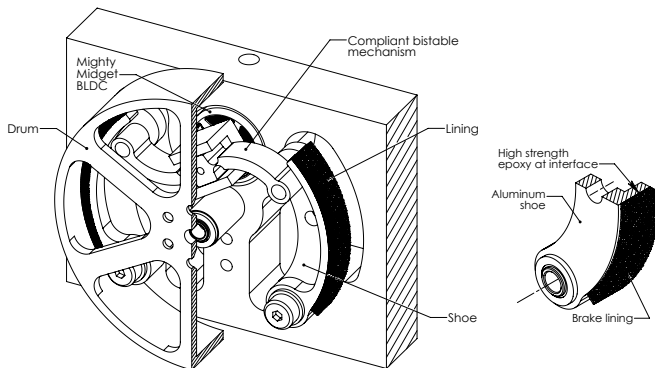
(left) Prototype assembly interior cutaway exposing the shoes and compliant bistable mechanism and (right) Shoe and brake lining
